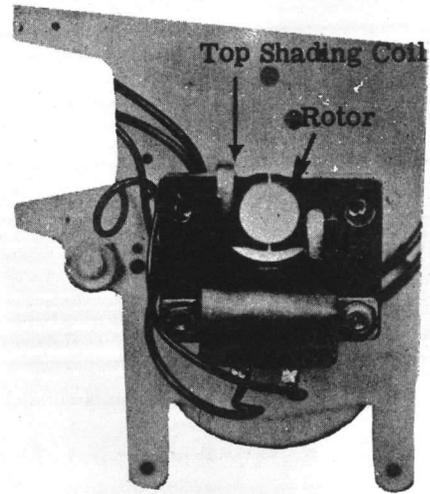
Cam Rotation Will Be Counter-Clockwise When Top Shading Coil of Motor is to Left of Rotor
